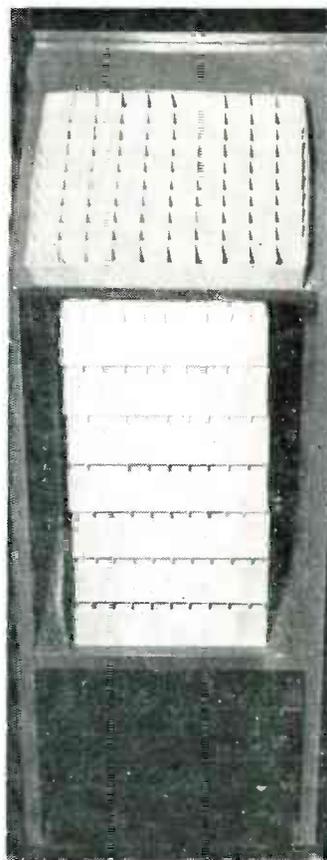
Universal welded-metal table for holding and storing cartons of small parts
